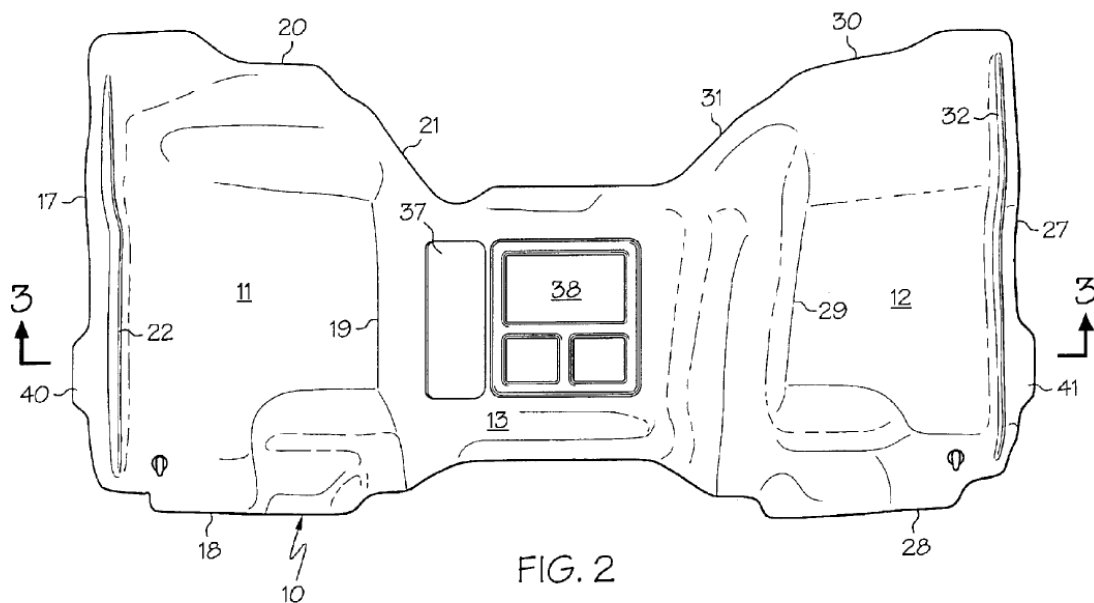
is a top plan view of the floor mat. Ex. 1005, 1:67. Floor mat 10 is one piece, “is made from a pliable plastic material and is molded to a contour which snugly fits into and covers the driver’s foot area, the front passenger’s foot area and a center hump in between the two foot areas.” *Id.* at 2:31–35. In particular, mat 10 has three contiguous sections, namely, driver foot area section 11, front passenger foot area section 12, and hump area section 13 connecting the driver and passenger foot area sections. *Id.* at 2:35–38. Stanesic explains that “raised wall 22 molded into the mat near and substantially parallel the first lateral edge 17 rises above the flat base 15 to create a tray-like central area in the section 11,” and that a similar raised wall 32 is formed in section 12. *Id.* at 2:59–62, 3:8–10.
